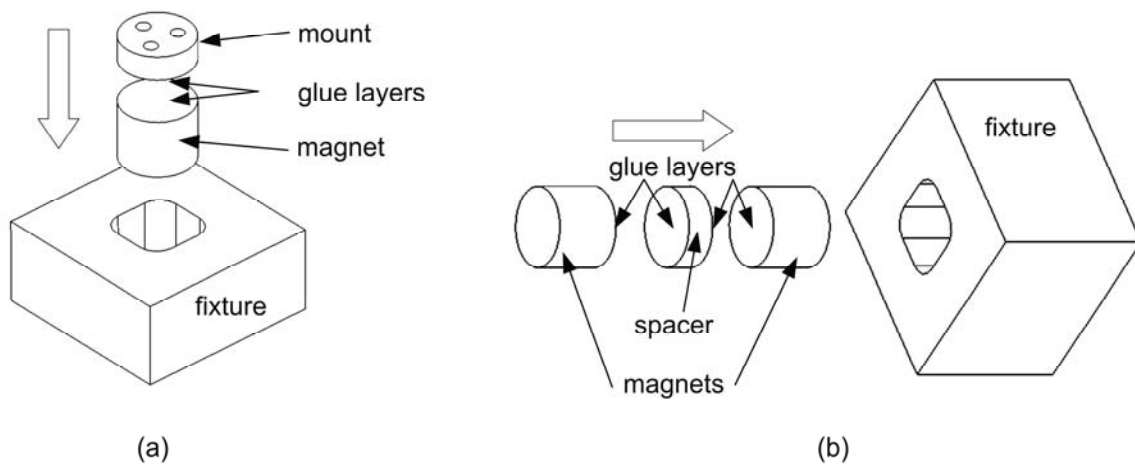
Tooling for gluing actuator units (a) vertical actuator and (b) horizontal actuator.
